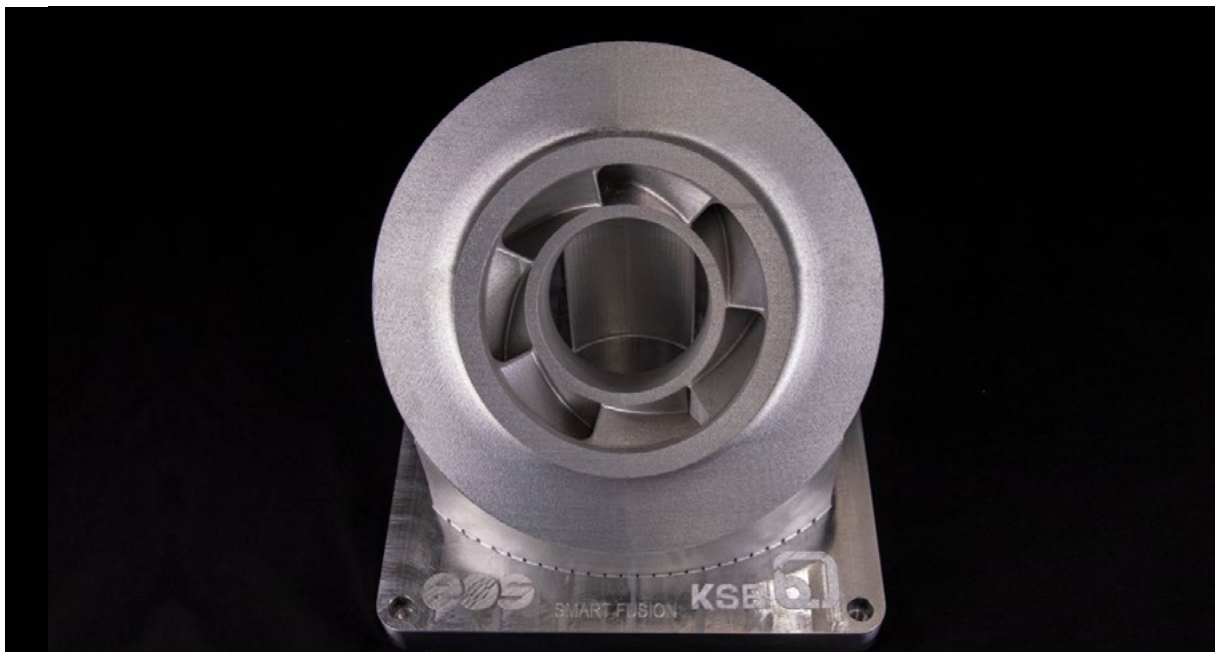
The impeller which was built on M 400-4 (Designed by: KSB) The diameter of this vast part is ~ 390 mm.
